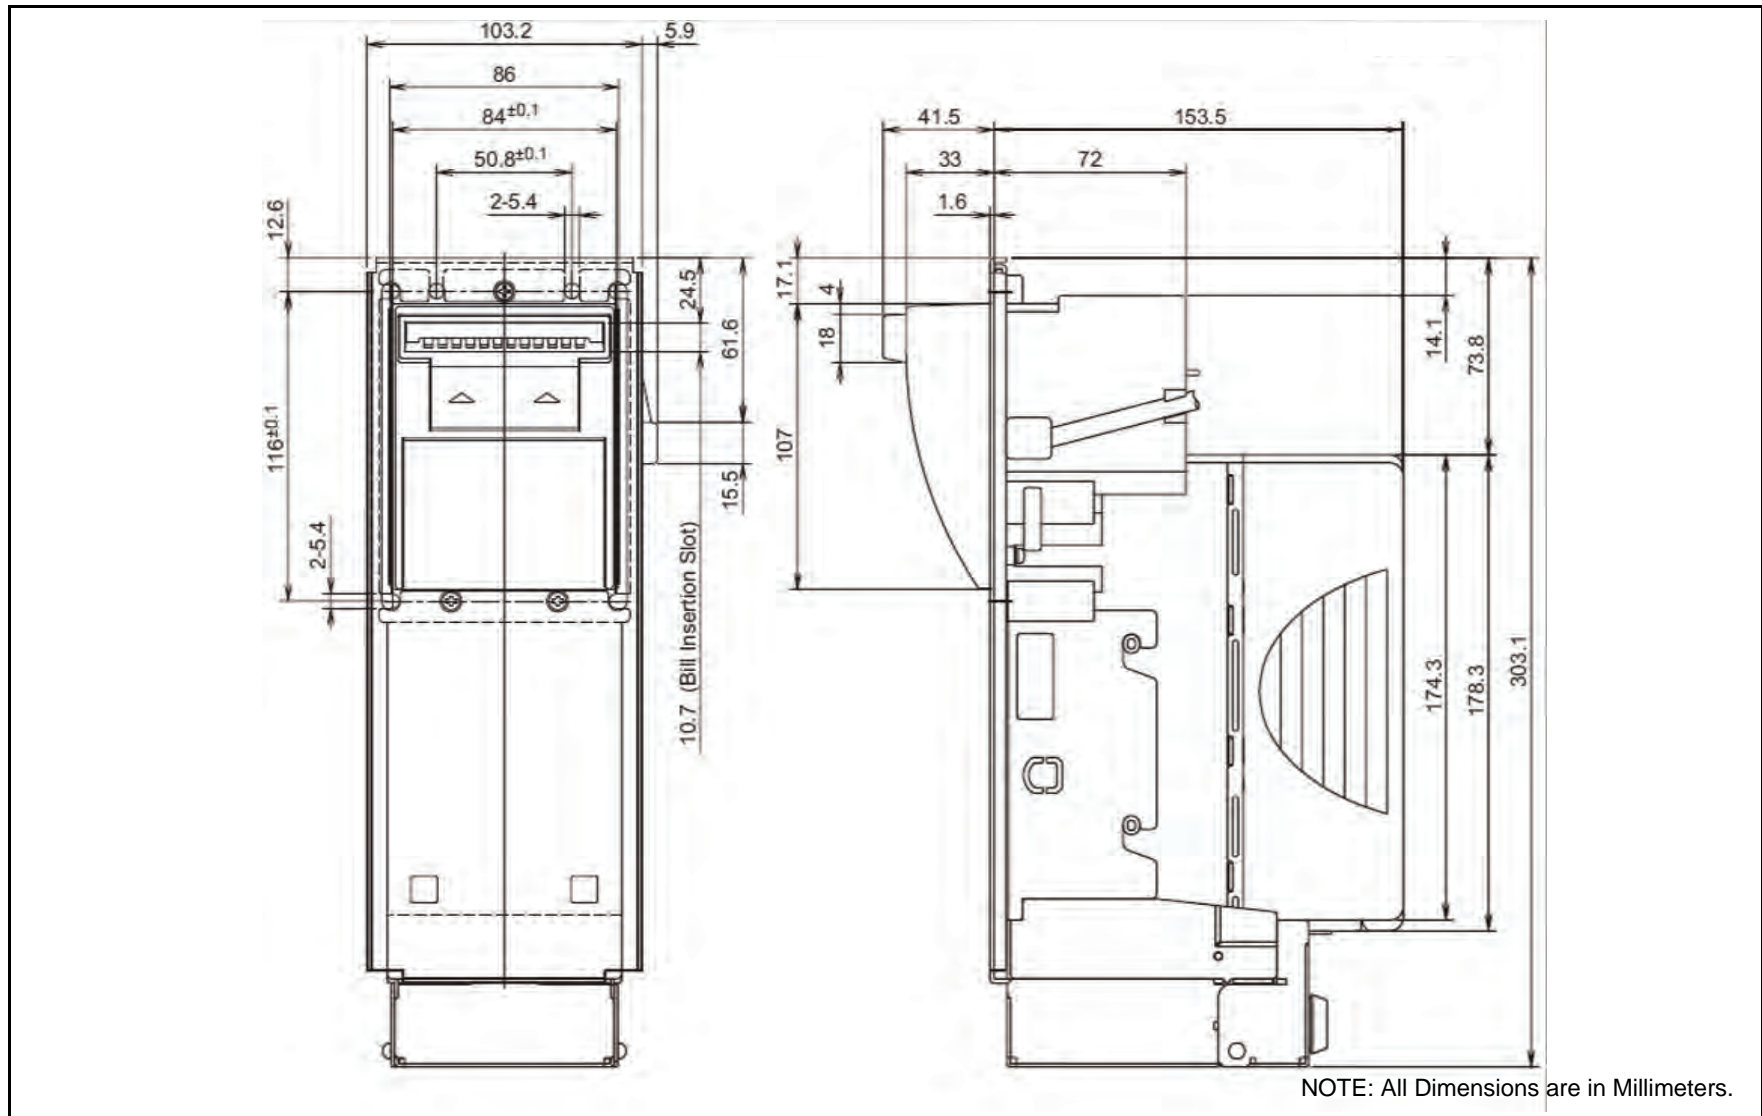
DBV-30X -SD Bill Validator Dimensions with a Type “C” Note Cash Box & Lock Assembly (Part 7)
